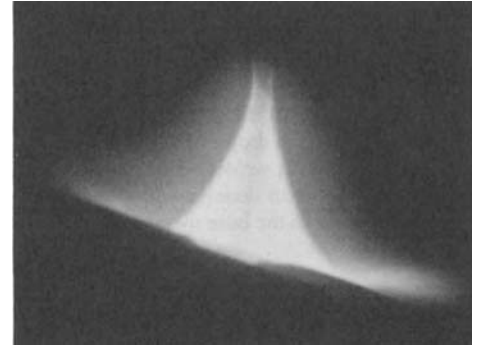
High-speed photograph of streaming transfer mode in gas metal arc welding of steel
